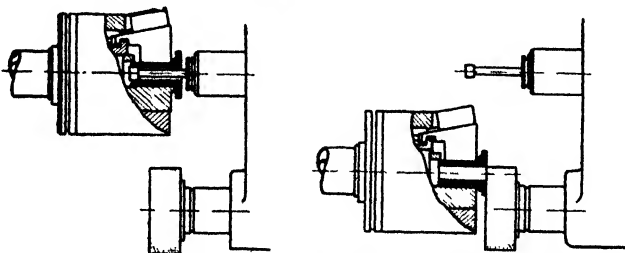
Similar layout for hardened-steel bearing plate, showing how the two spindles of the Bryant grinder operate.
